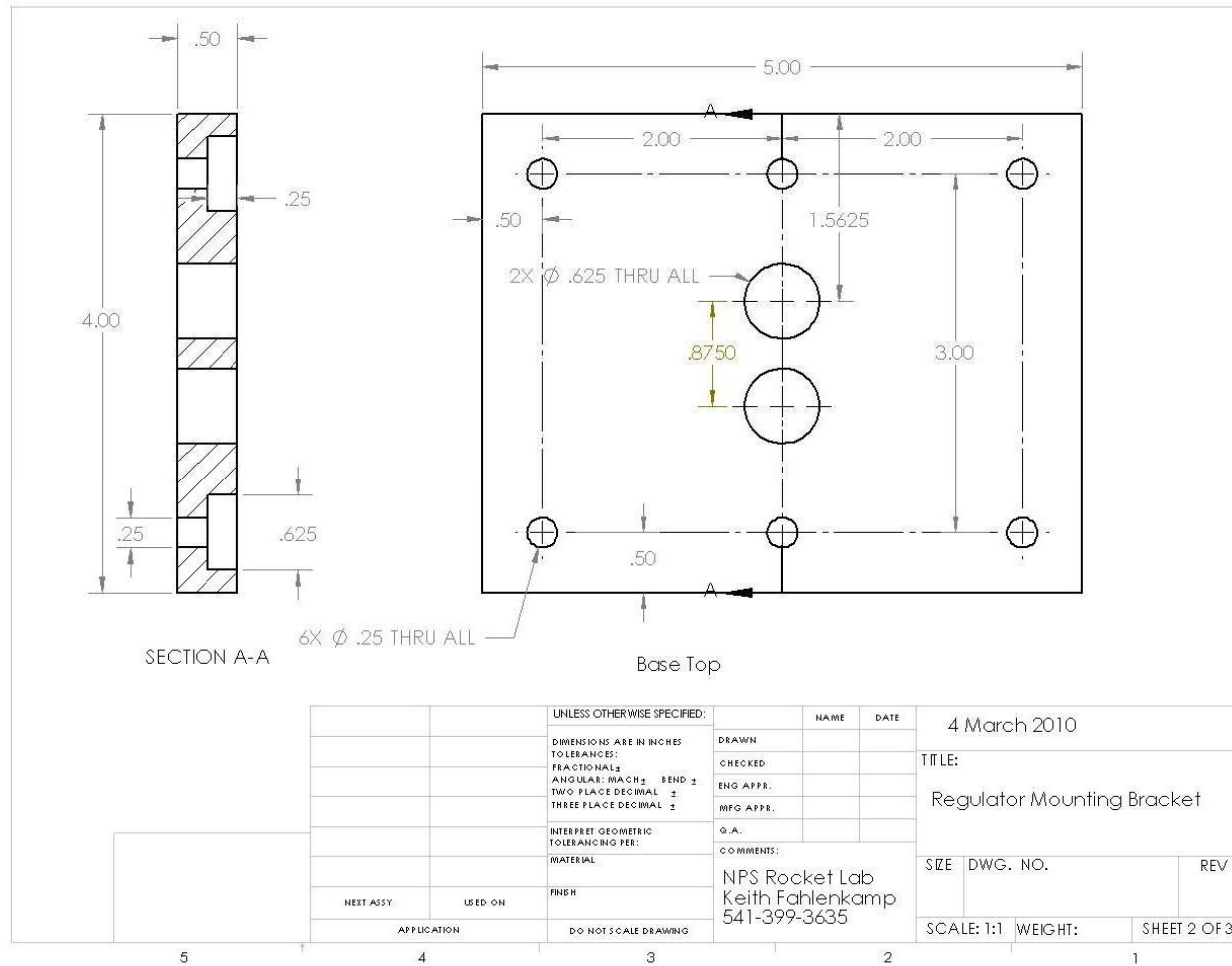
Regulator Mounting Bracket Sheet 2 of 3 (Base)
